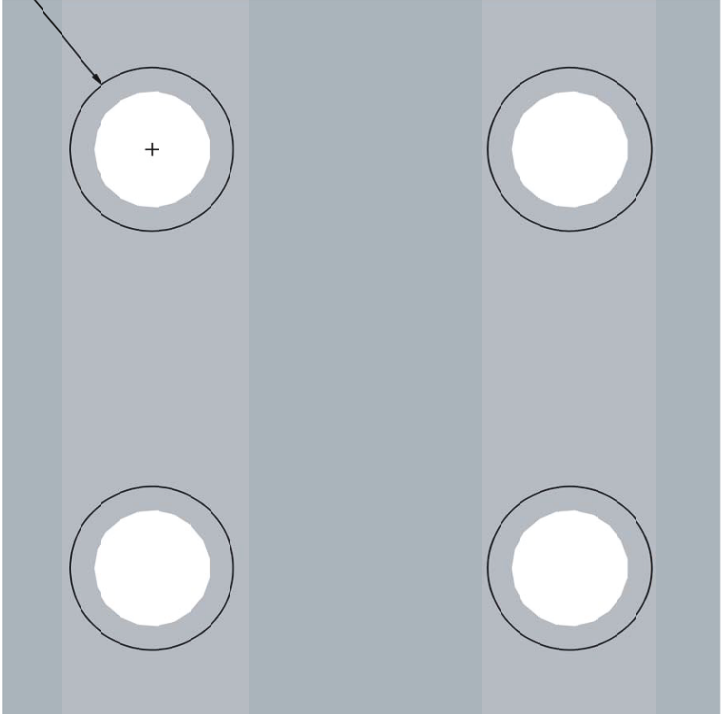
Bottom view of glycerol cup. Counterbores allow screw heads to recess into part.
